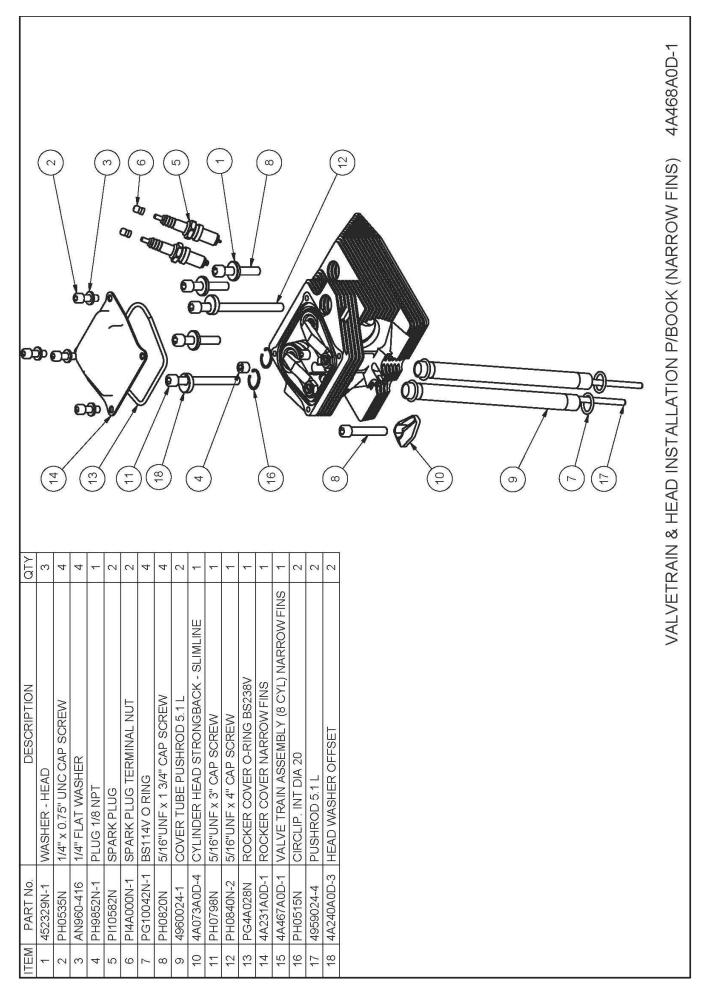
Head Mounting & Pushrod Assembly (Narrow Fins) S/N 34 on
